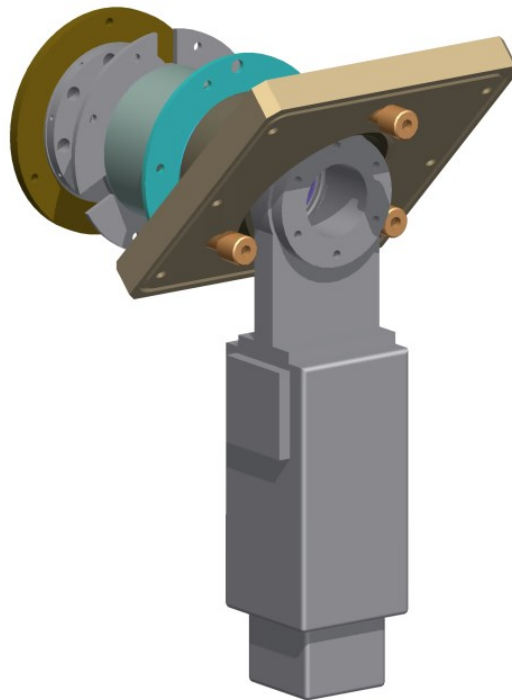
Model view of the low-particulate beam-line gate valve assembly showing the cold to warm transitions, the angled end-plate, the gate-valve body and the port for a 2 3/4" Con Flat type flange.
